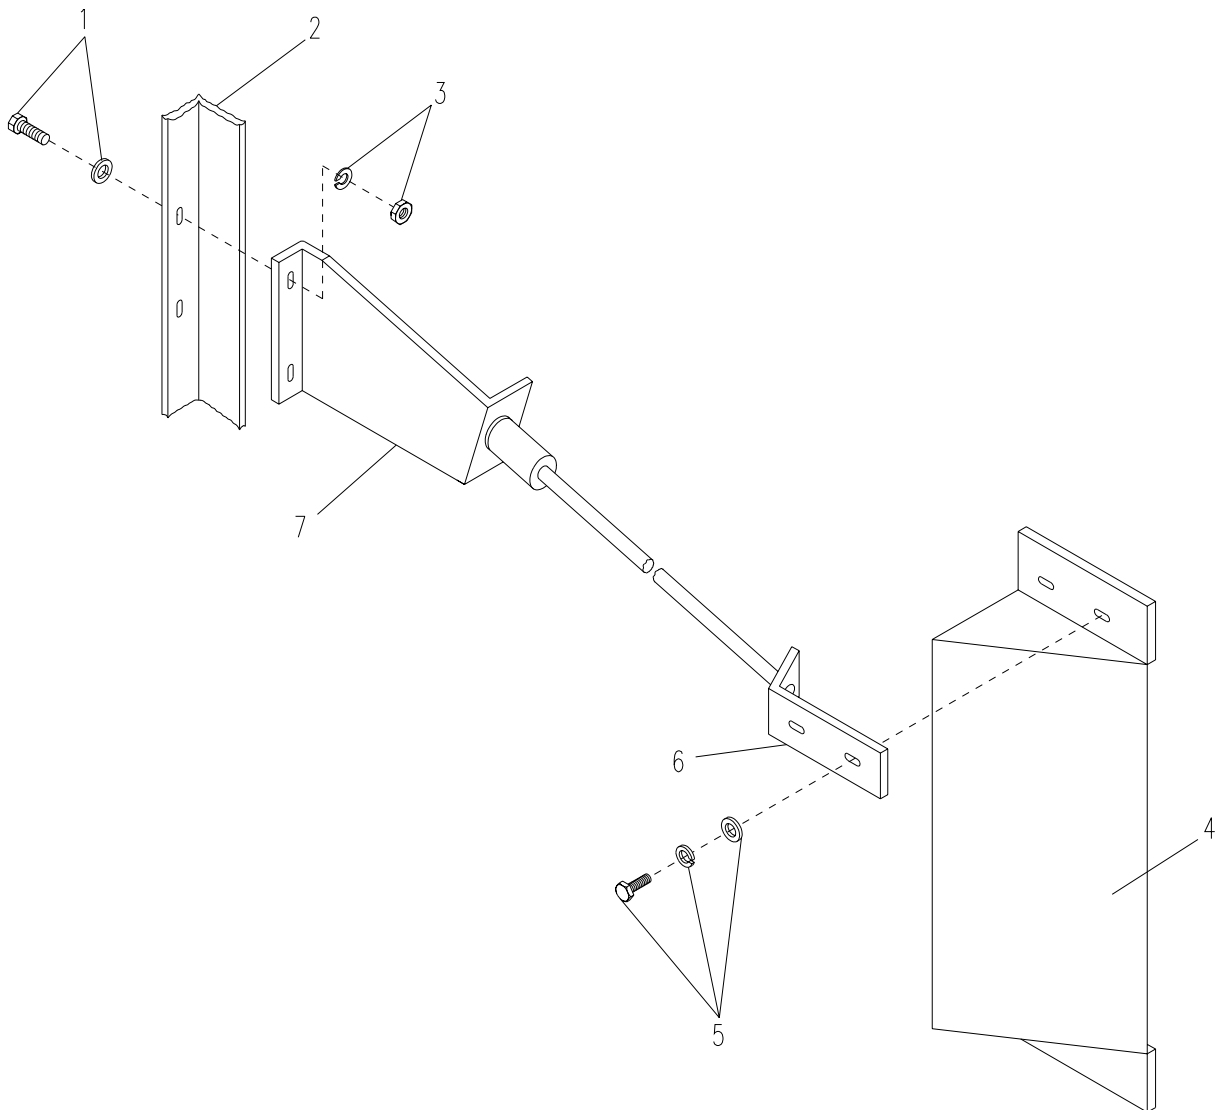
Fan Guard, Fan Shroud, and Shroud Housing (Sheet 1 of 2)
